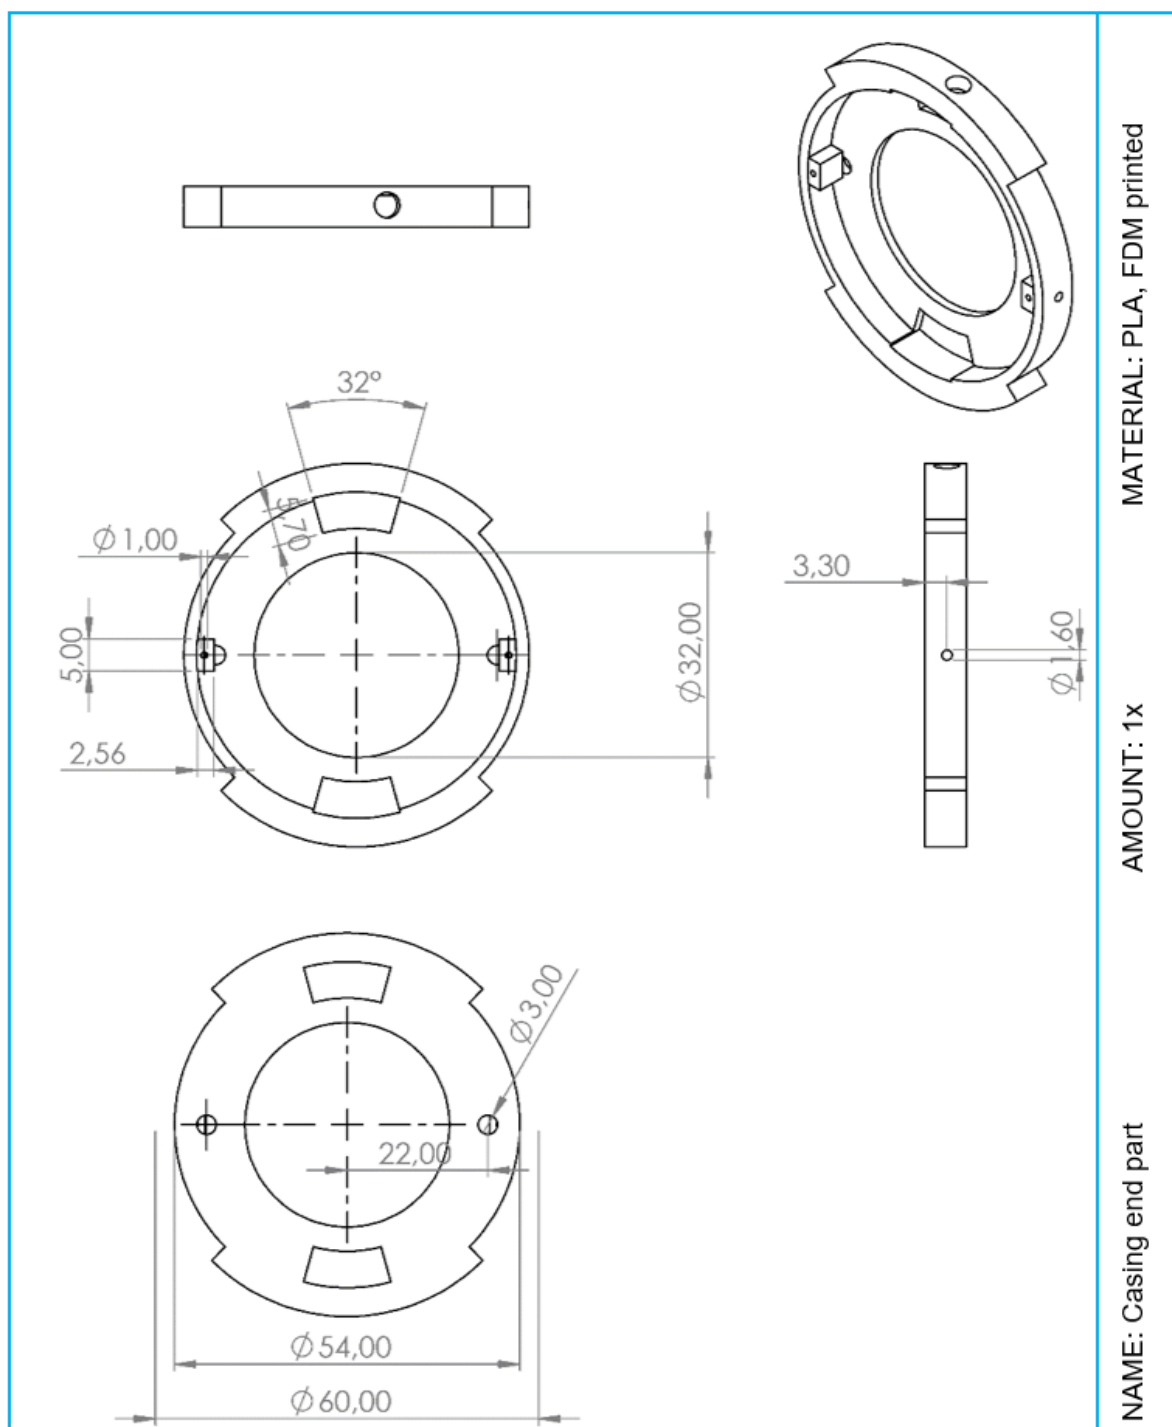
Construction drawings of the casing end part - 3D Printed prototype
